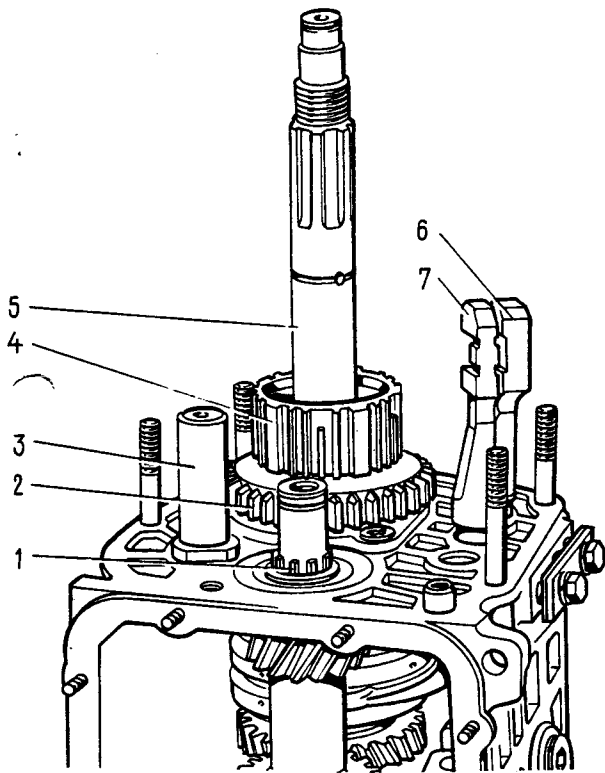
Removing Reverse Driven Gear and 5th Speed Synchronizer Sleeve Hub:
